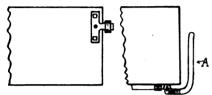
BOTTOM PLAN OF END GATE FASTENER.
